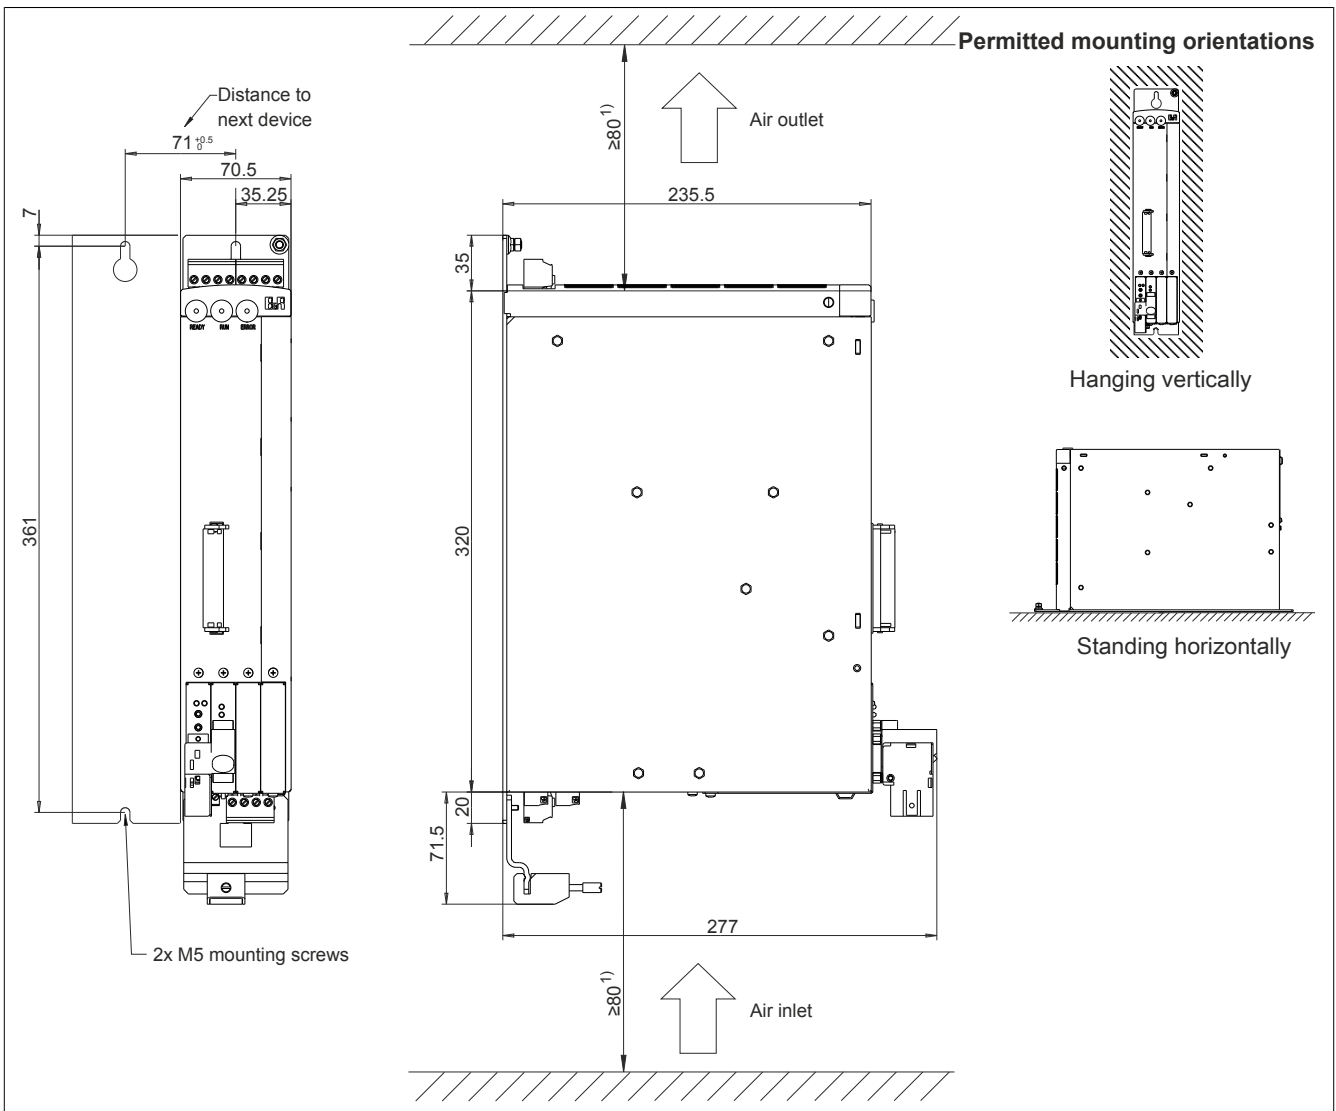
ACOPOS 1022, 1045, 1090 - Dimension diagram and installation dimensions
